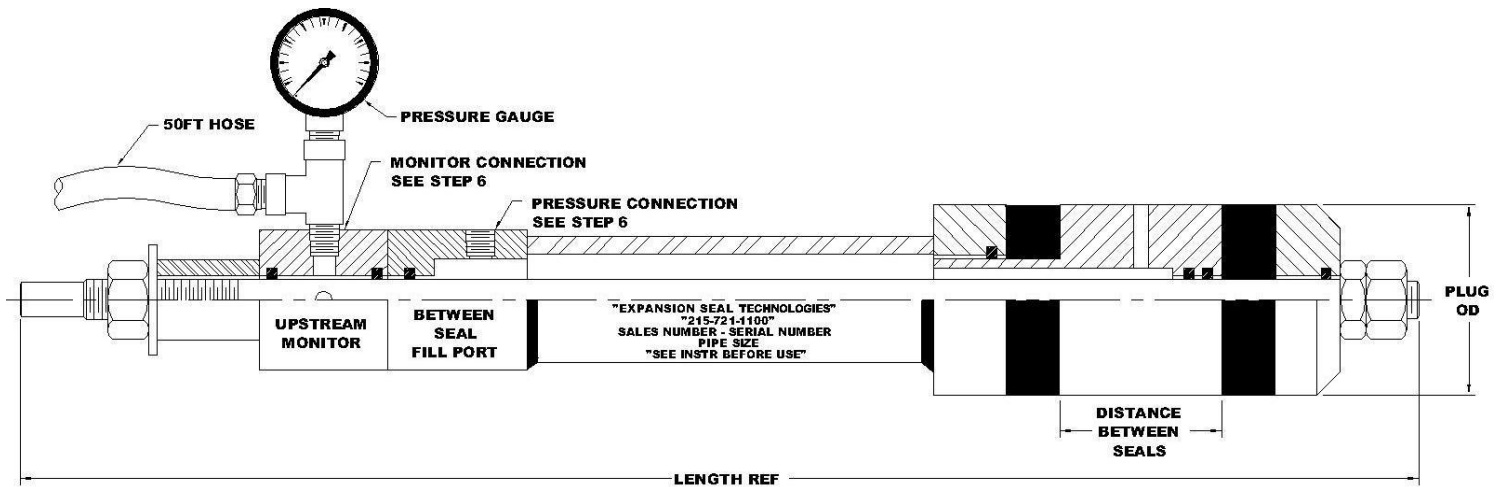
Double Block & Bleed, 1 1/2" to 3" Plug Sizes
